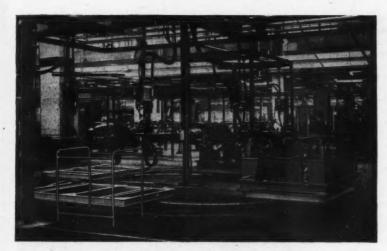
EView of the roundabout for final welding operations on roof subassemblies for the Aronde car. Four trolleys move on a track, and are fitted with welding jigs, two of which are seen in position
